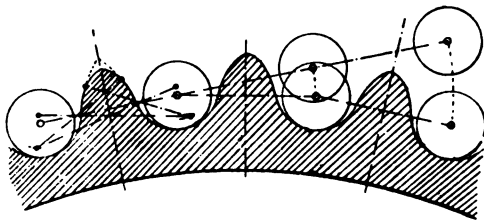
Diagram showing Tooth construction for Roller Chain.
